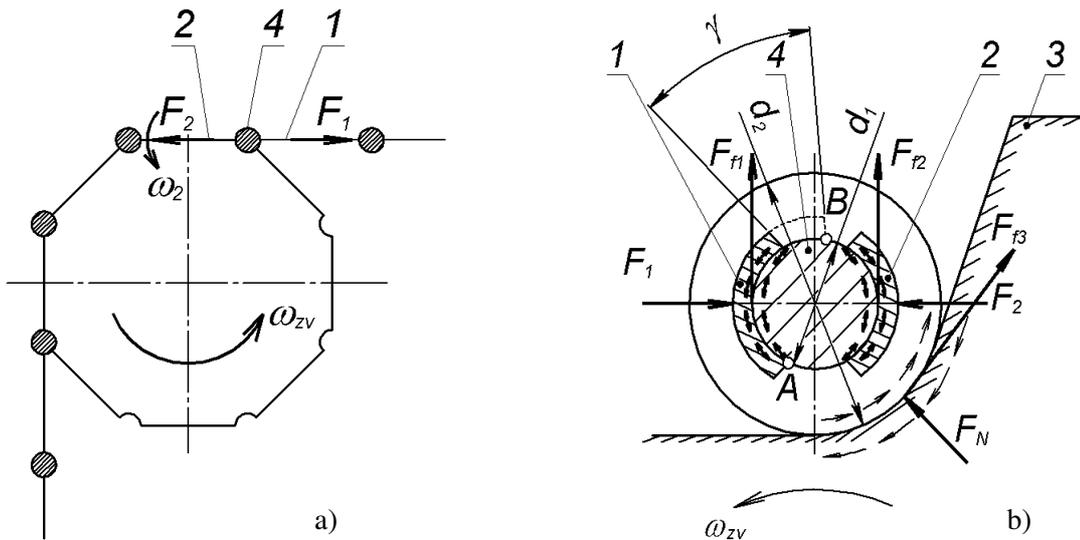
Scheme of pivot operation for chain section, which enters in gearing with asterisk:
